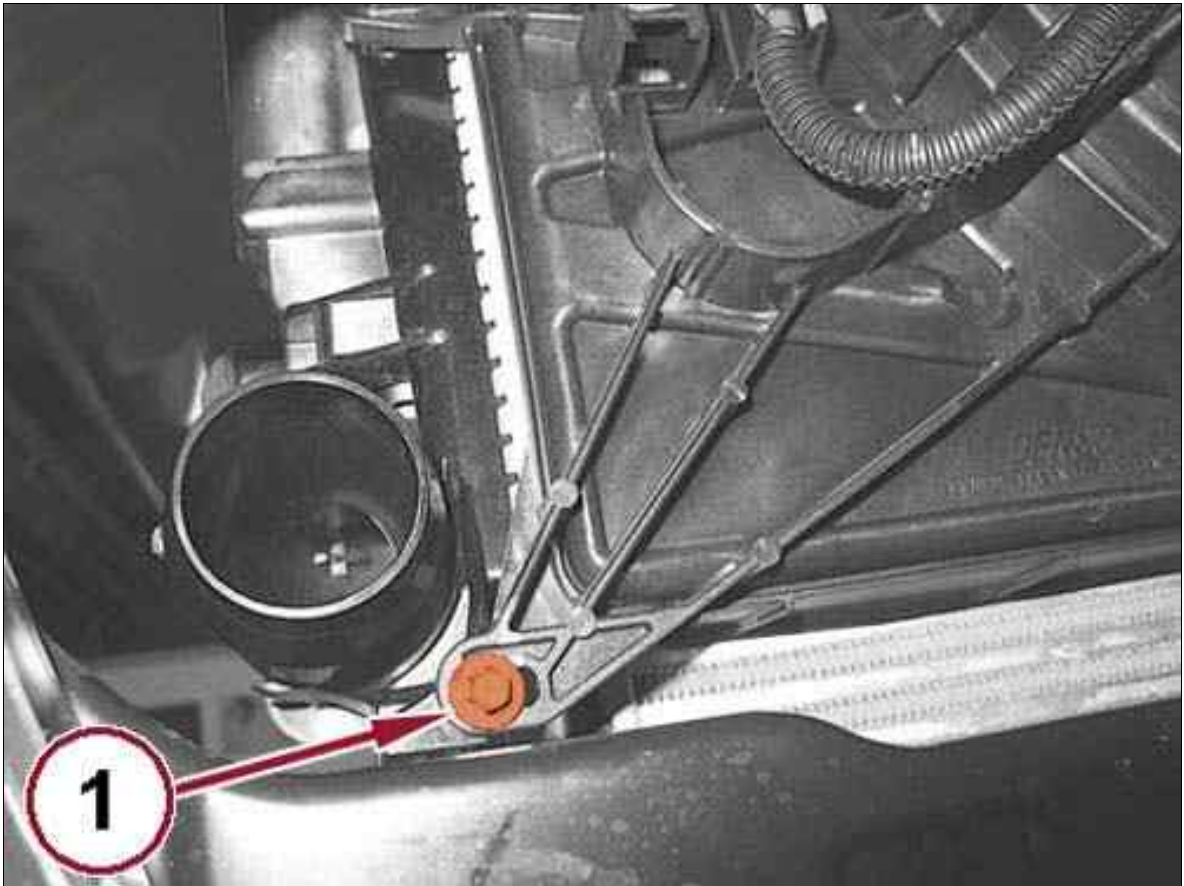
Charge Air Cooler Quick Coupling Sleeve
